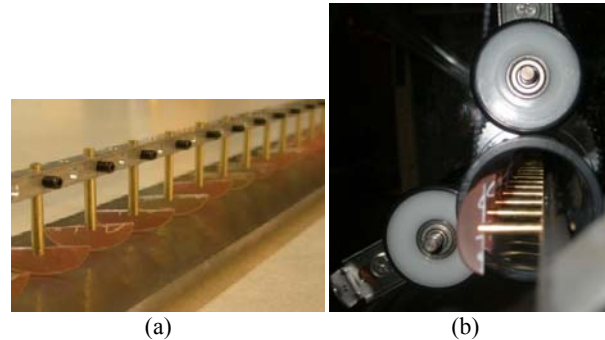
(a) Blades being aligned on a machinists flat, and (b) Blades inside of prototype centrifuging pipe conveyor under construction at Tuskegee.
